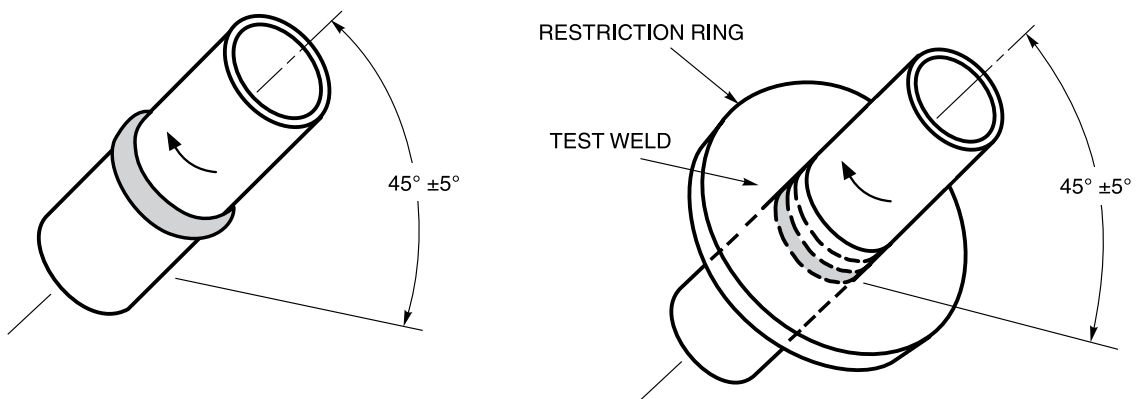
Welding Test Positions for Groove Welds in Pipe or Tubing
